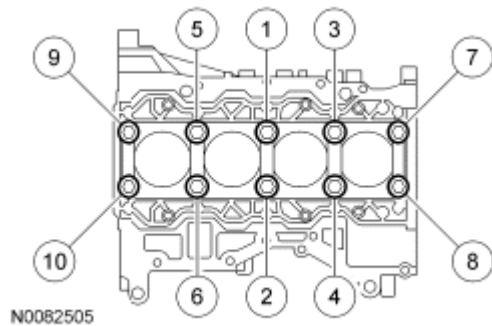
Identifying Main Bearing Beam Bolt Tightening Sequence
